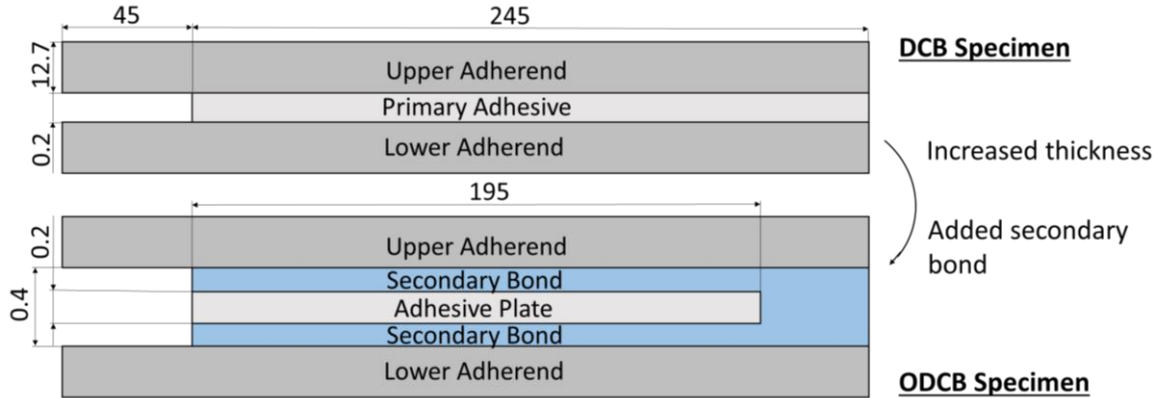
Differences between the DCB and ODCB specimens (dimensions in mm).
